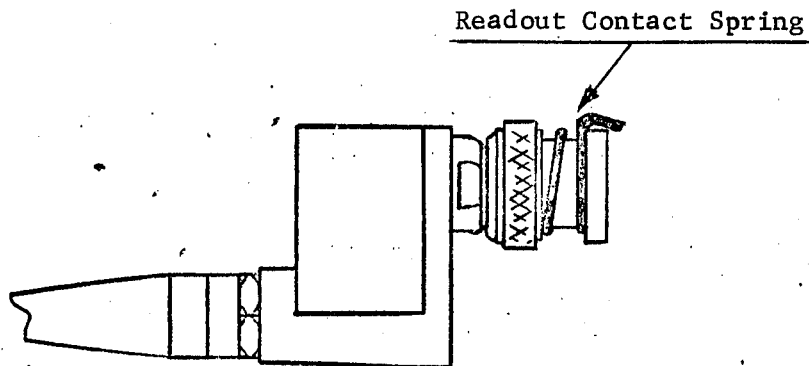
P6061 BNC connector, showing the Readout Contact Spring in proper position.
